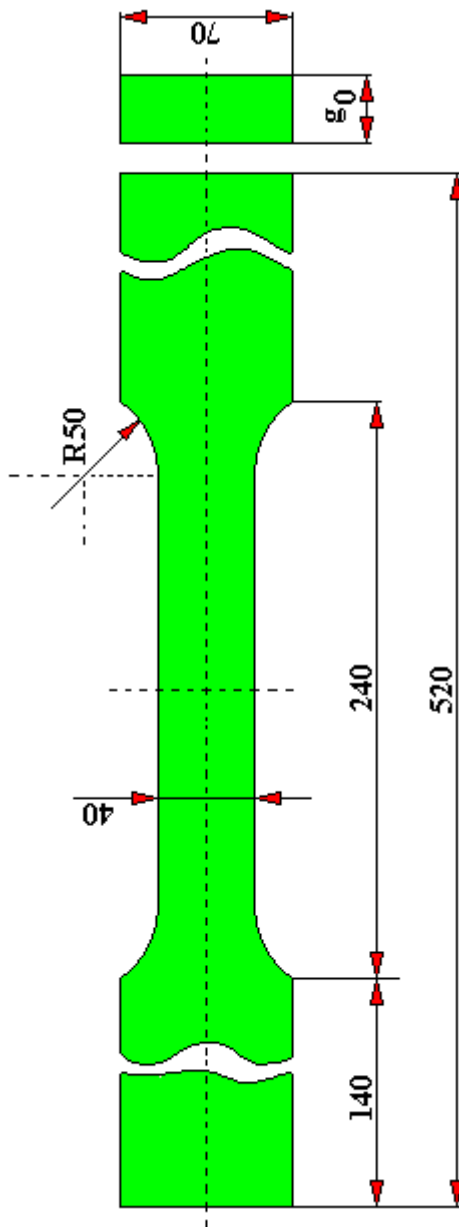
The shape and dimensions of the sample for determining the frictional resistance in the stamping process according to Ju. P.Kazakov [52]
